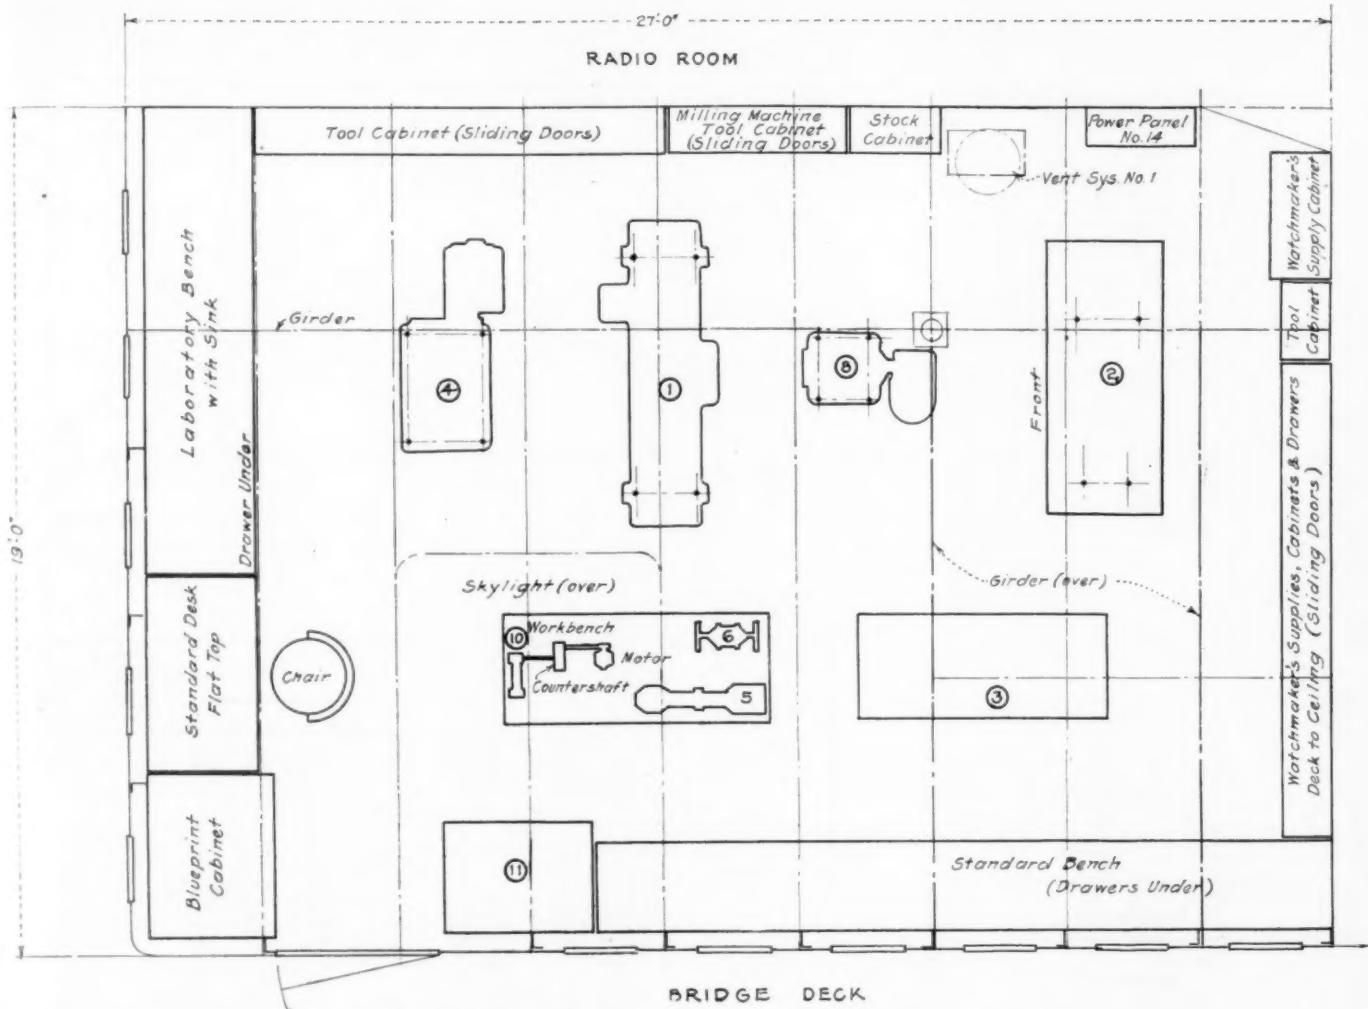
LAYOUT OF TOOLS IN OPTICAL SHOP, U. S. S. "DOBBIN"
